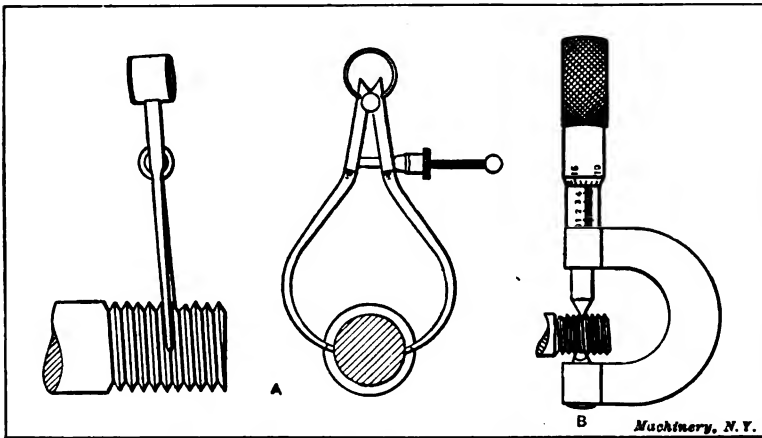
Testing Diameter of Thread with Calipers and Micrometer
